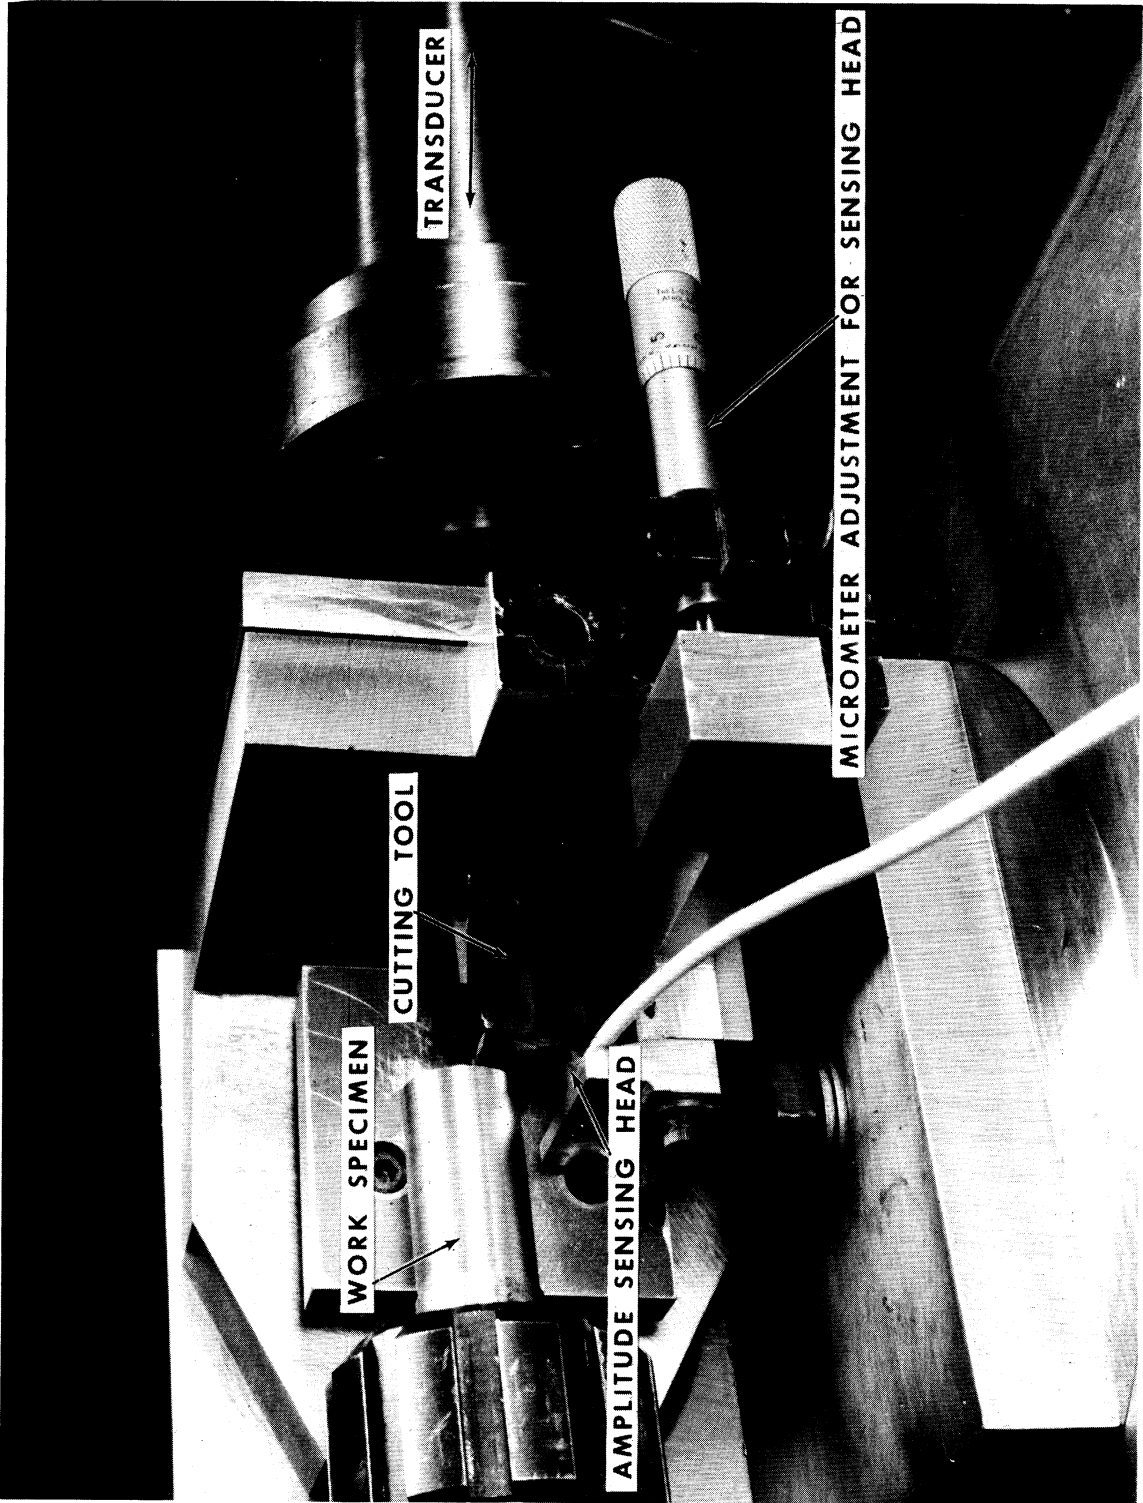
Close-up view of specimen with tool positioned for vibrating horizontally in feeding mode.
